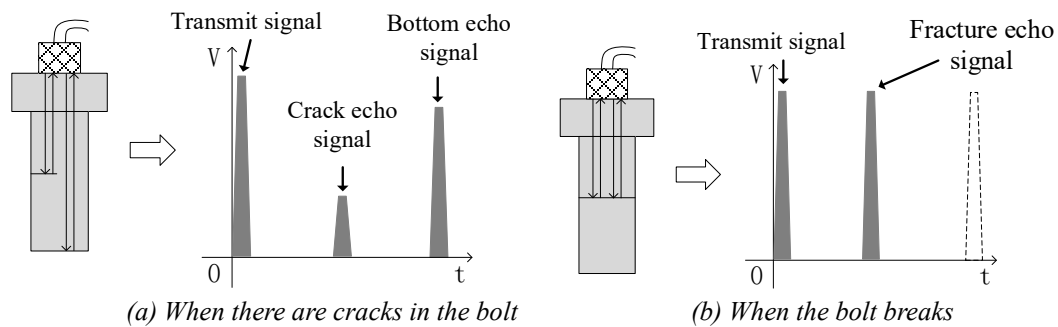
Ultrasonic signal when the bolt has cracks or fractures
